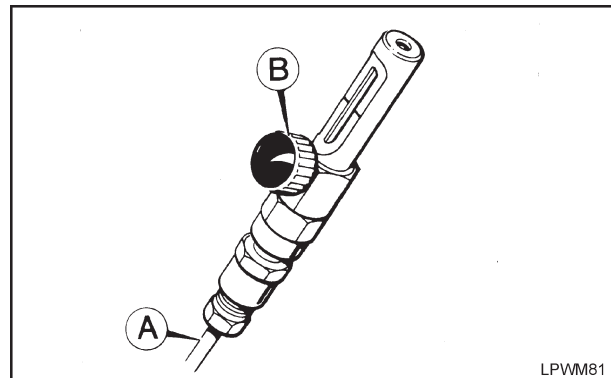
Fuel Pump Timing Gauge - 317-50518 -
